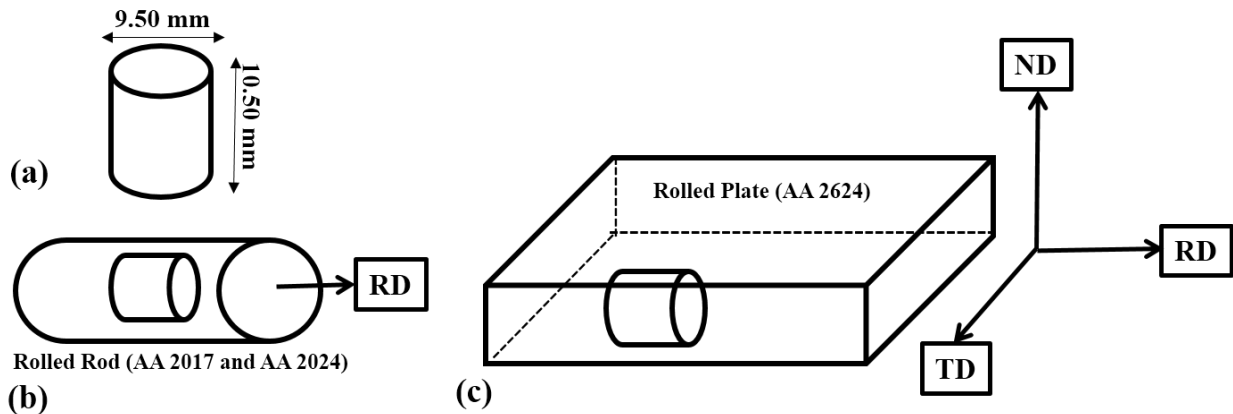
Schematic of cylindrical test specimens showing (a) dimension and (b & c) cutting direction.
